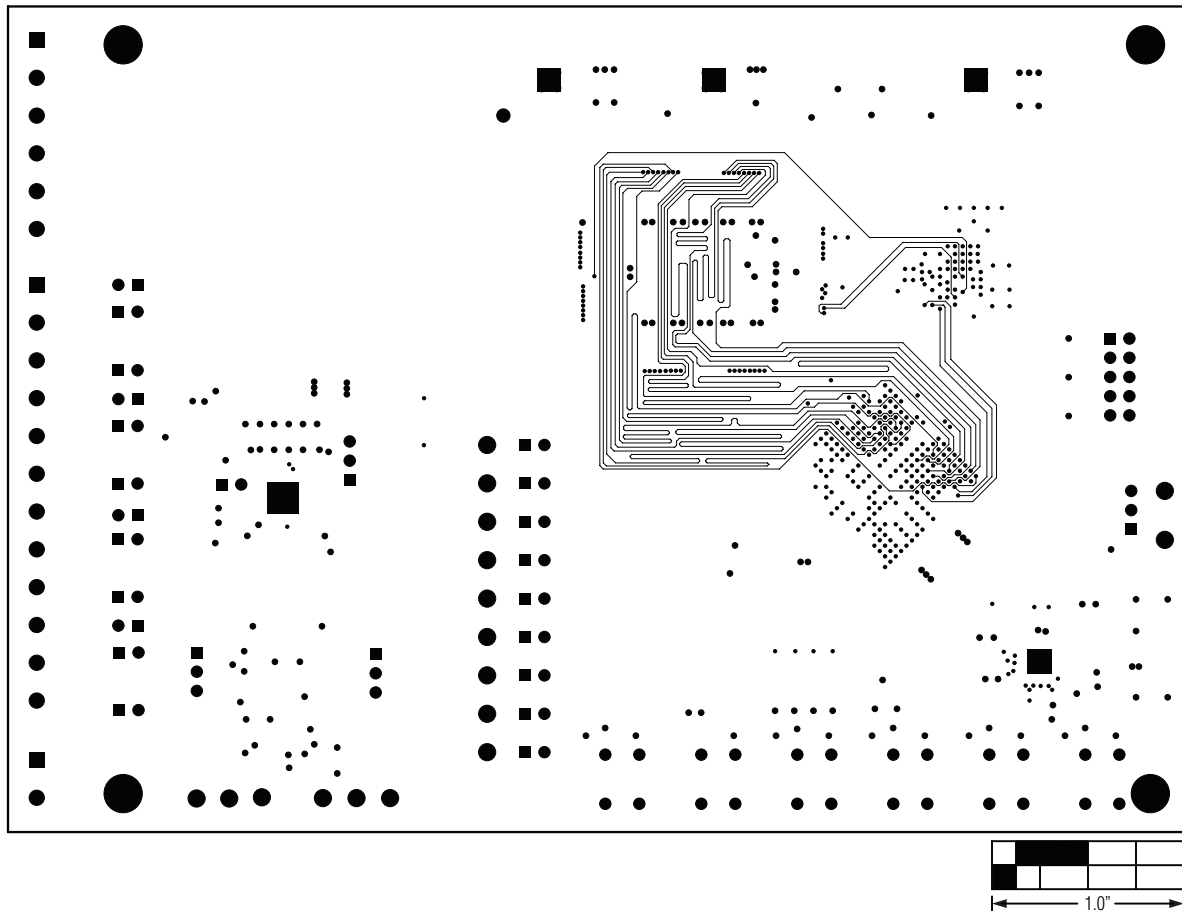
MAX11043 EV Kit PCB Layout—Signal Layer 3
